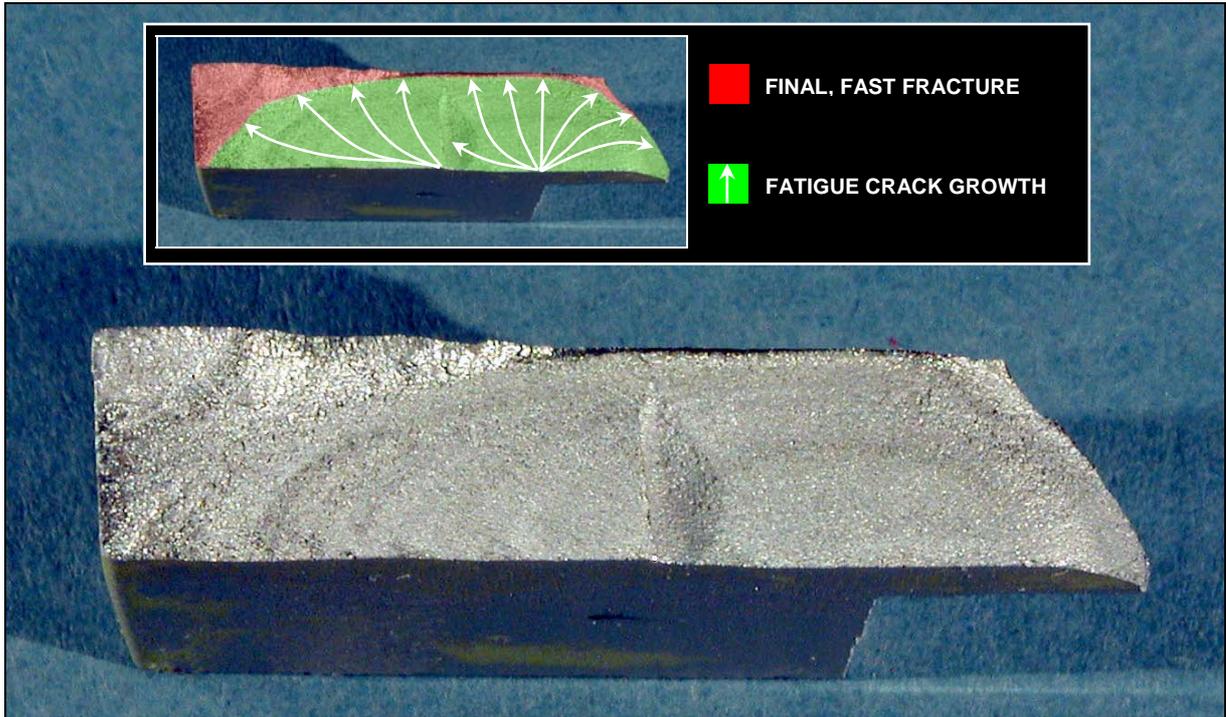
Close view of the fracture surface of section A, as indicated in figure 3. Fatigue cracks had initiated at the concave surface of the spring and grew primarily in the direction of the convex surface.
